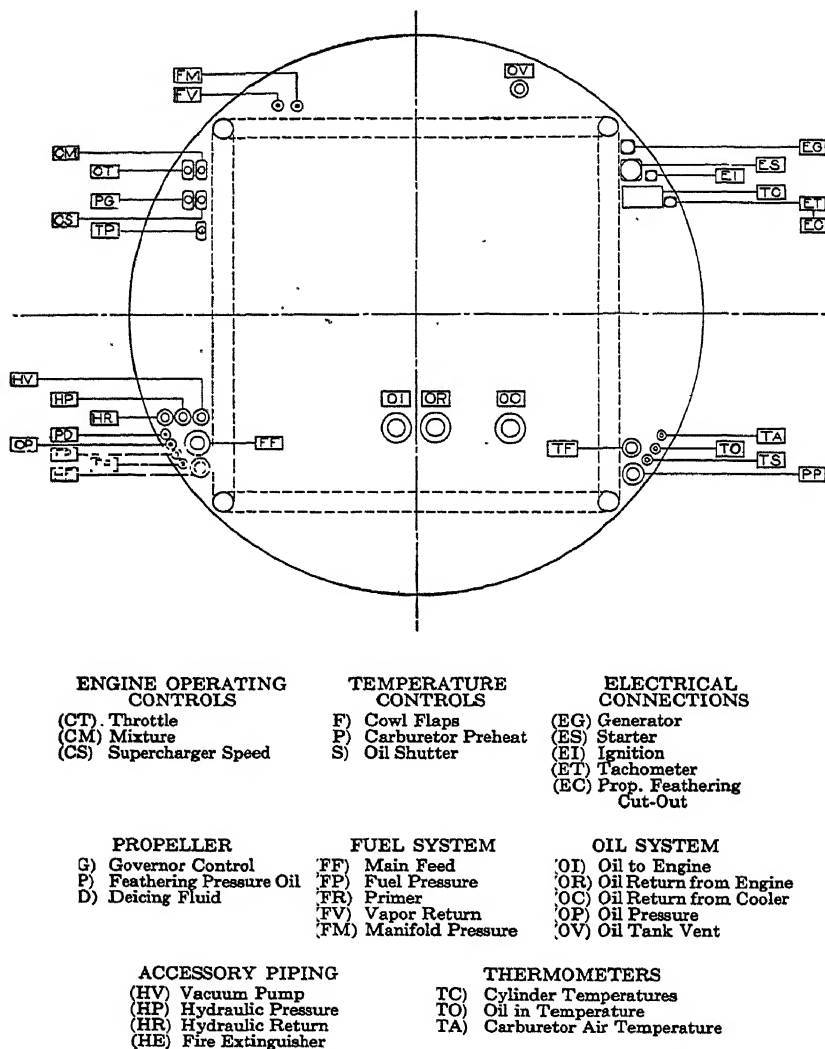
Layout of the fire wall for an installation such as that in Fig. 158.
